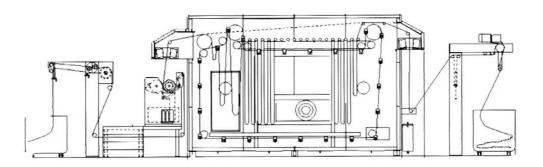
Scheme of a steaming machine (the fabric moves in laps or on sticks)
